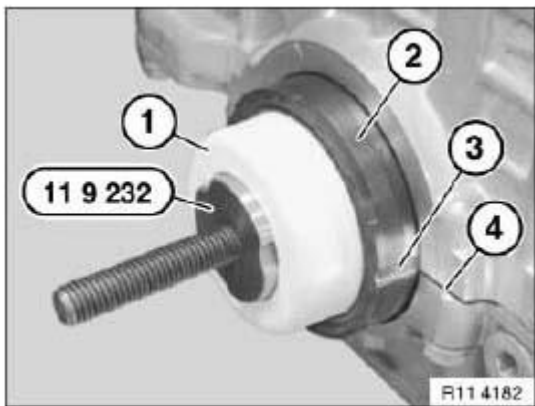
Identifying Sleeve, Crankshaft Seal, Groove And Housing Partition With Special Tool (11 9 232)
